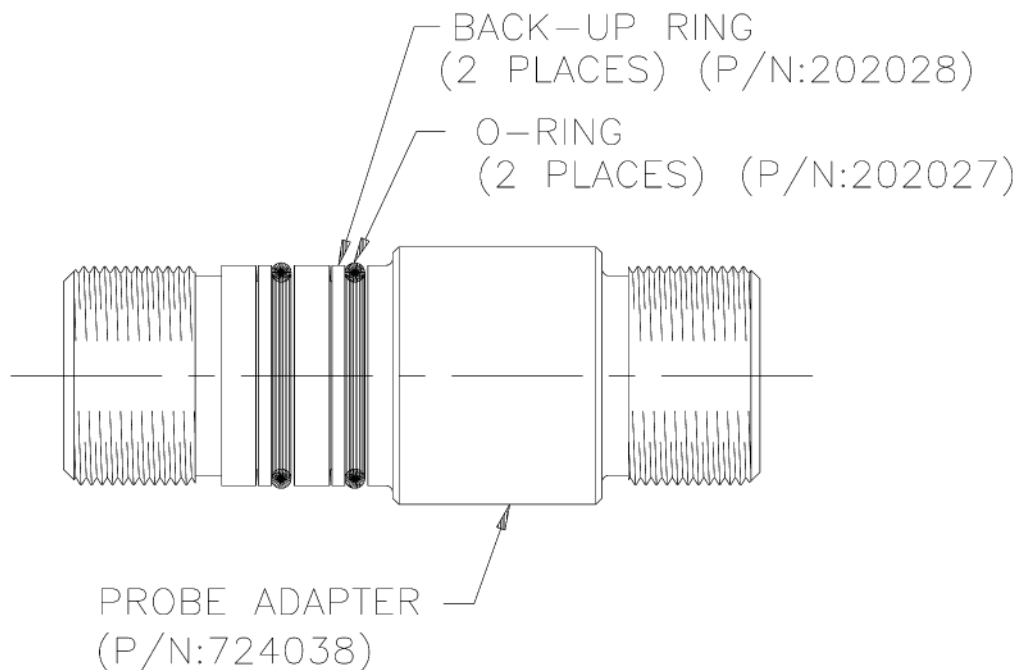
Probe Adapter O-Ring and Back-Up Ring Placement
